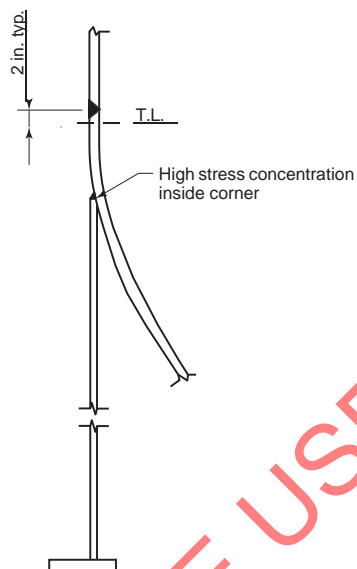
Typical Skirt-to-Shell Fillet Weld Detail Used in Earlier Drum Construction
